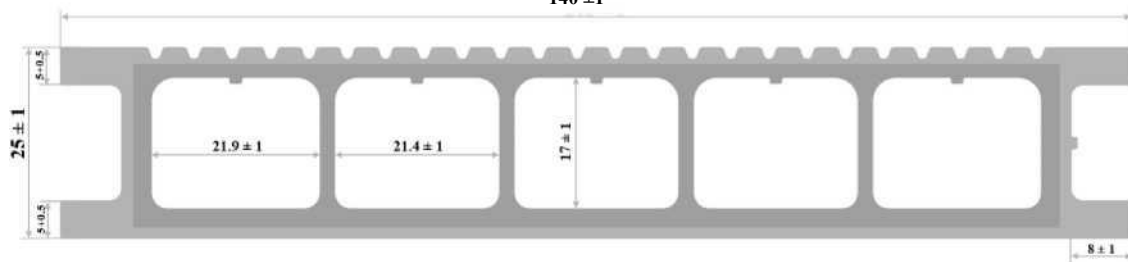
GAMRAT WPC Decking Board 140x25 mm SLIM, single-sided grooved
